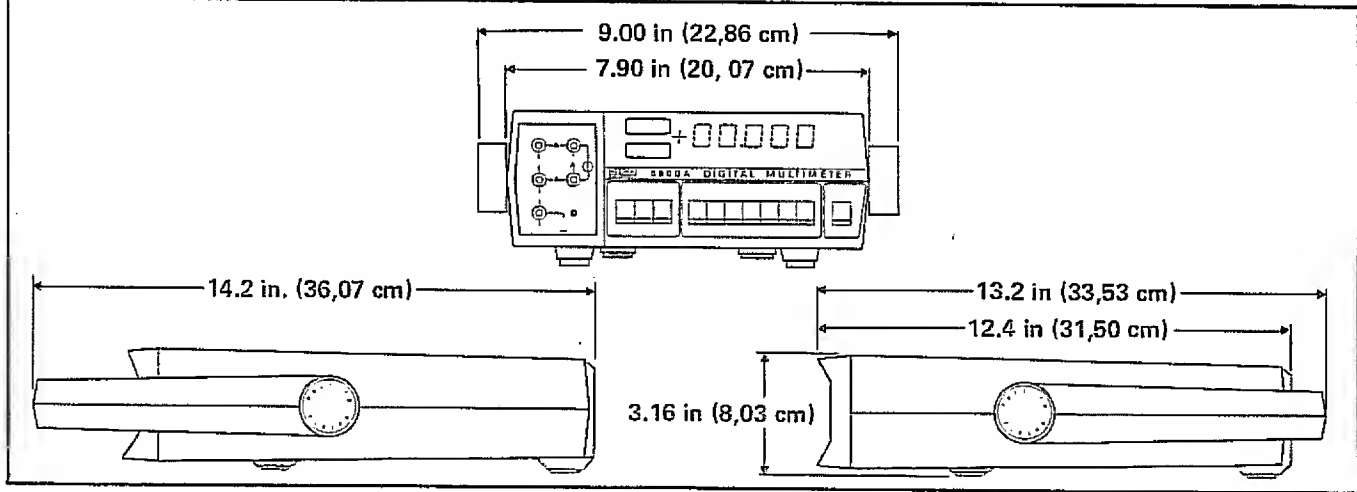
MODEL 8800A OUTLINE DRAWING
